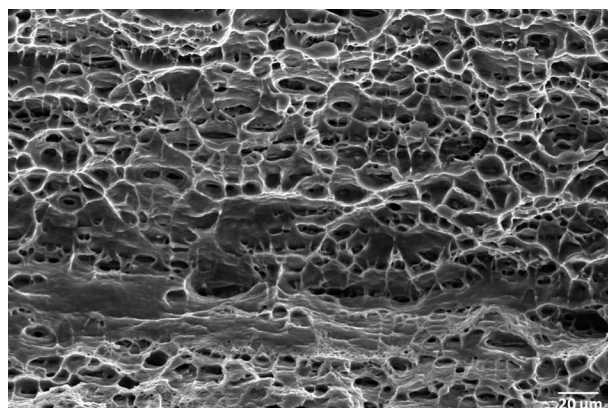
High magnified image of fracture surface shown in Fig. 162. Note the presence of elongated dimples
